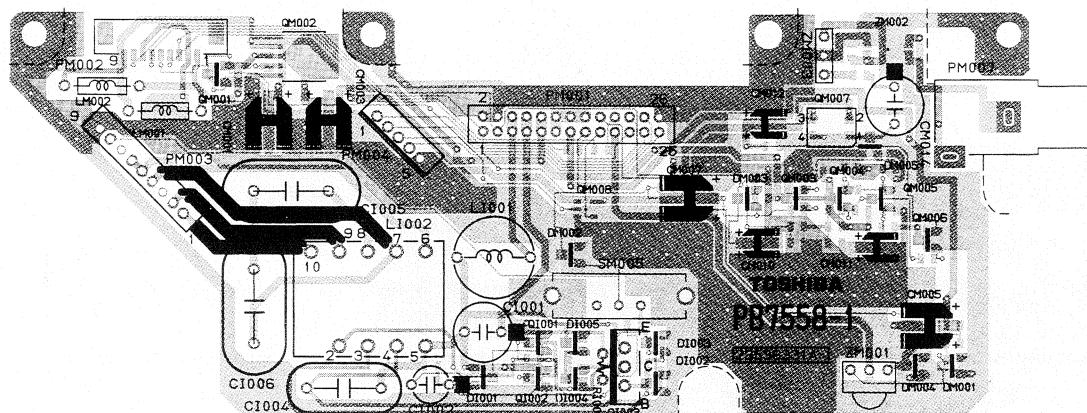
U0041 Inverter PC Board (Top Side)
